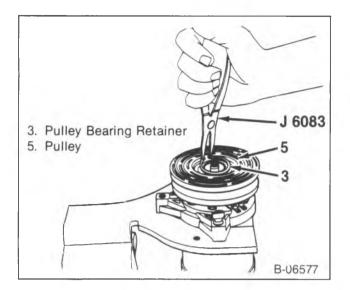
Removing the Pulley Rotor and Bearing Retaining Ring
